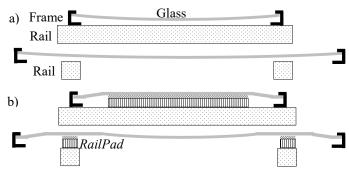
Cross-section drawings along the center of the short and long axes of modules under a front side load for a) standard mounting, and b) *RailPad* deflection mounting.
